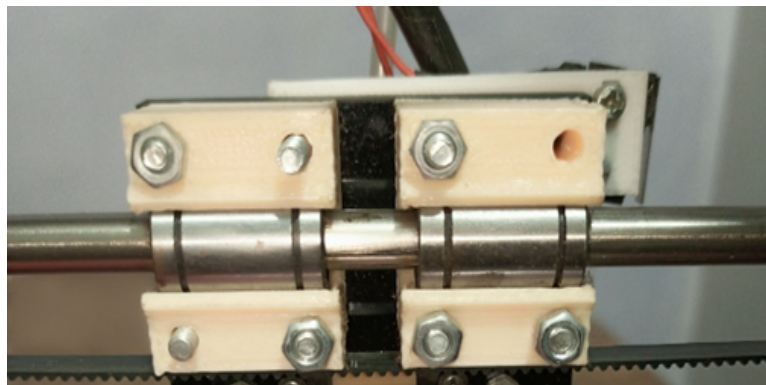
Linear Motion Ball Bearing Slide Bushing
